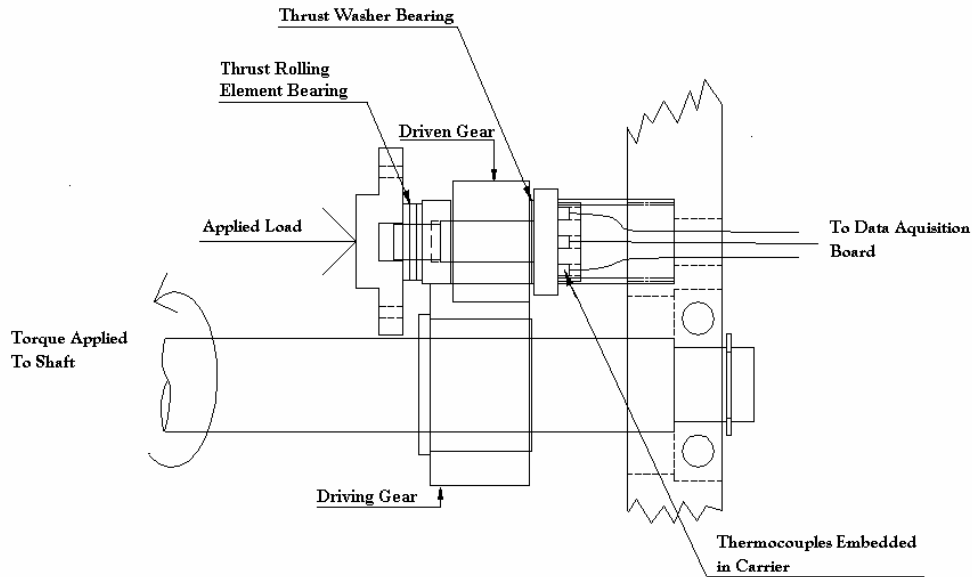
Diagram of thrust washer bearing testing configuration within the test rig.
